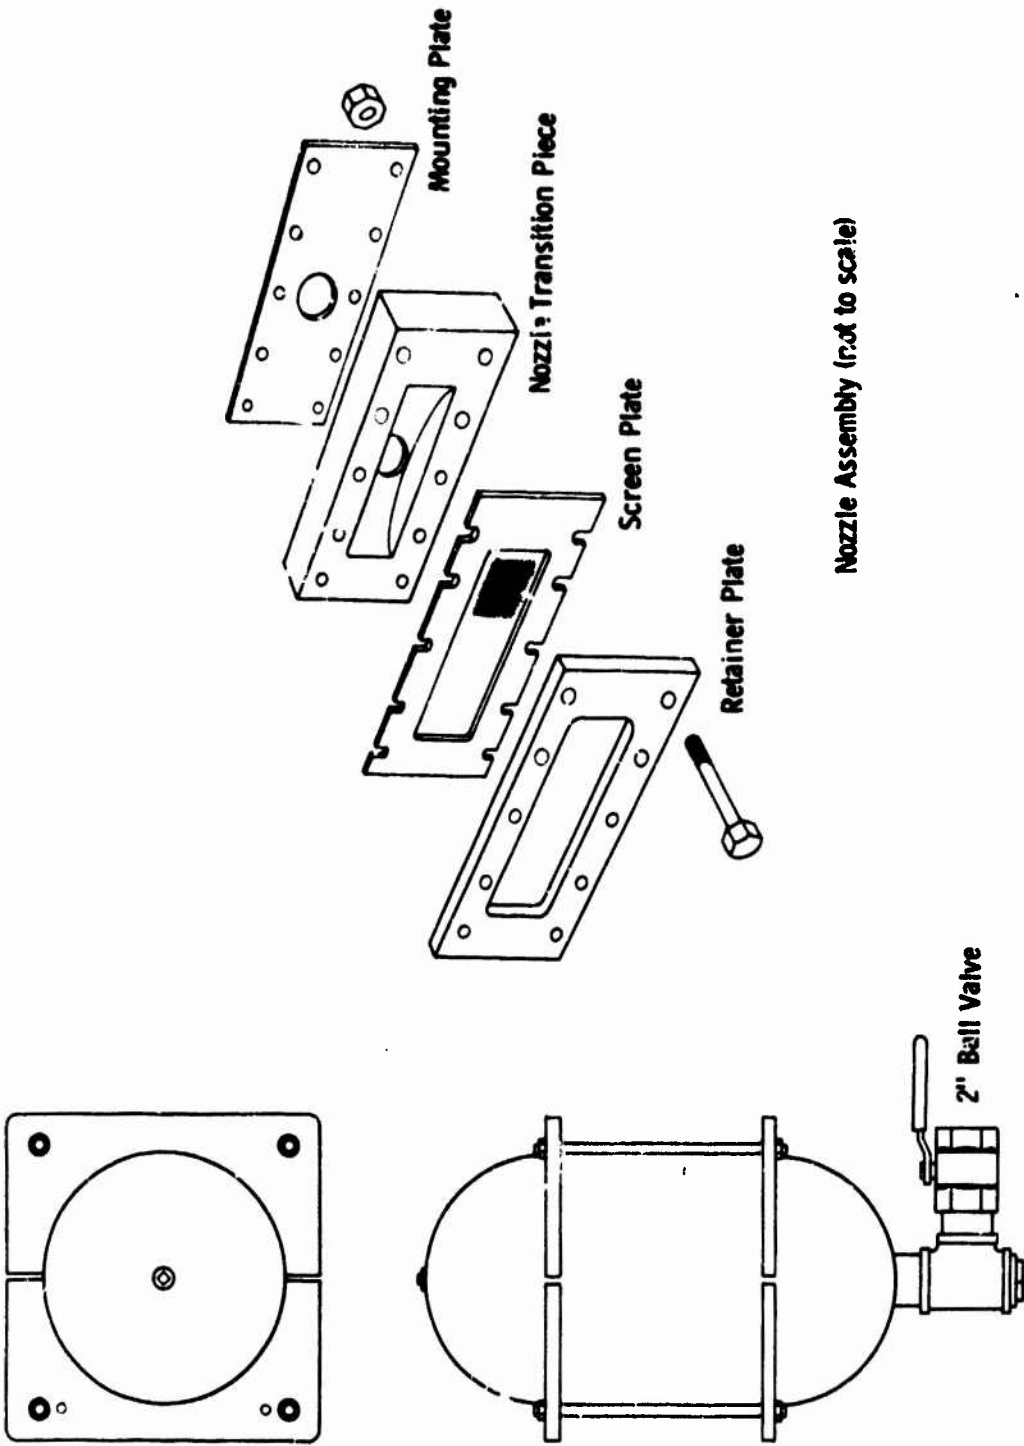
Tank Assembly and Nozzle Assembly Foam Extrusion Unit
